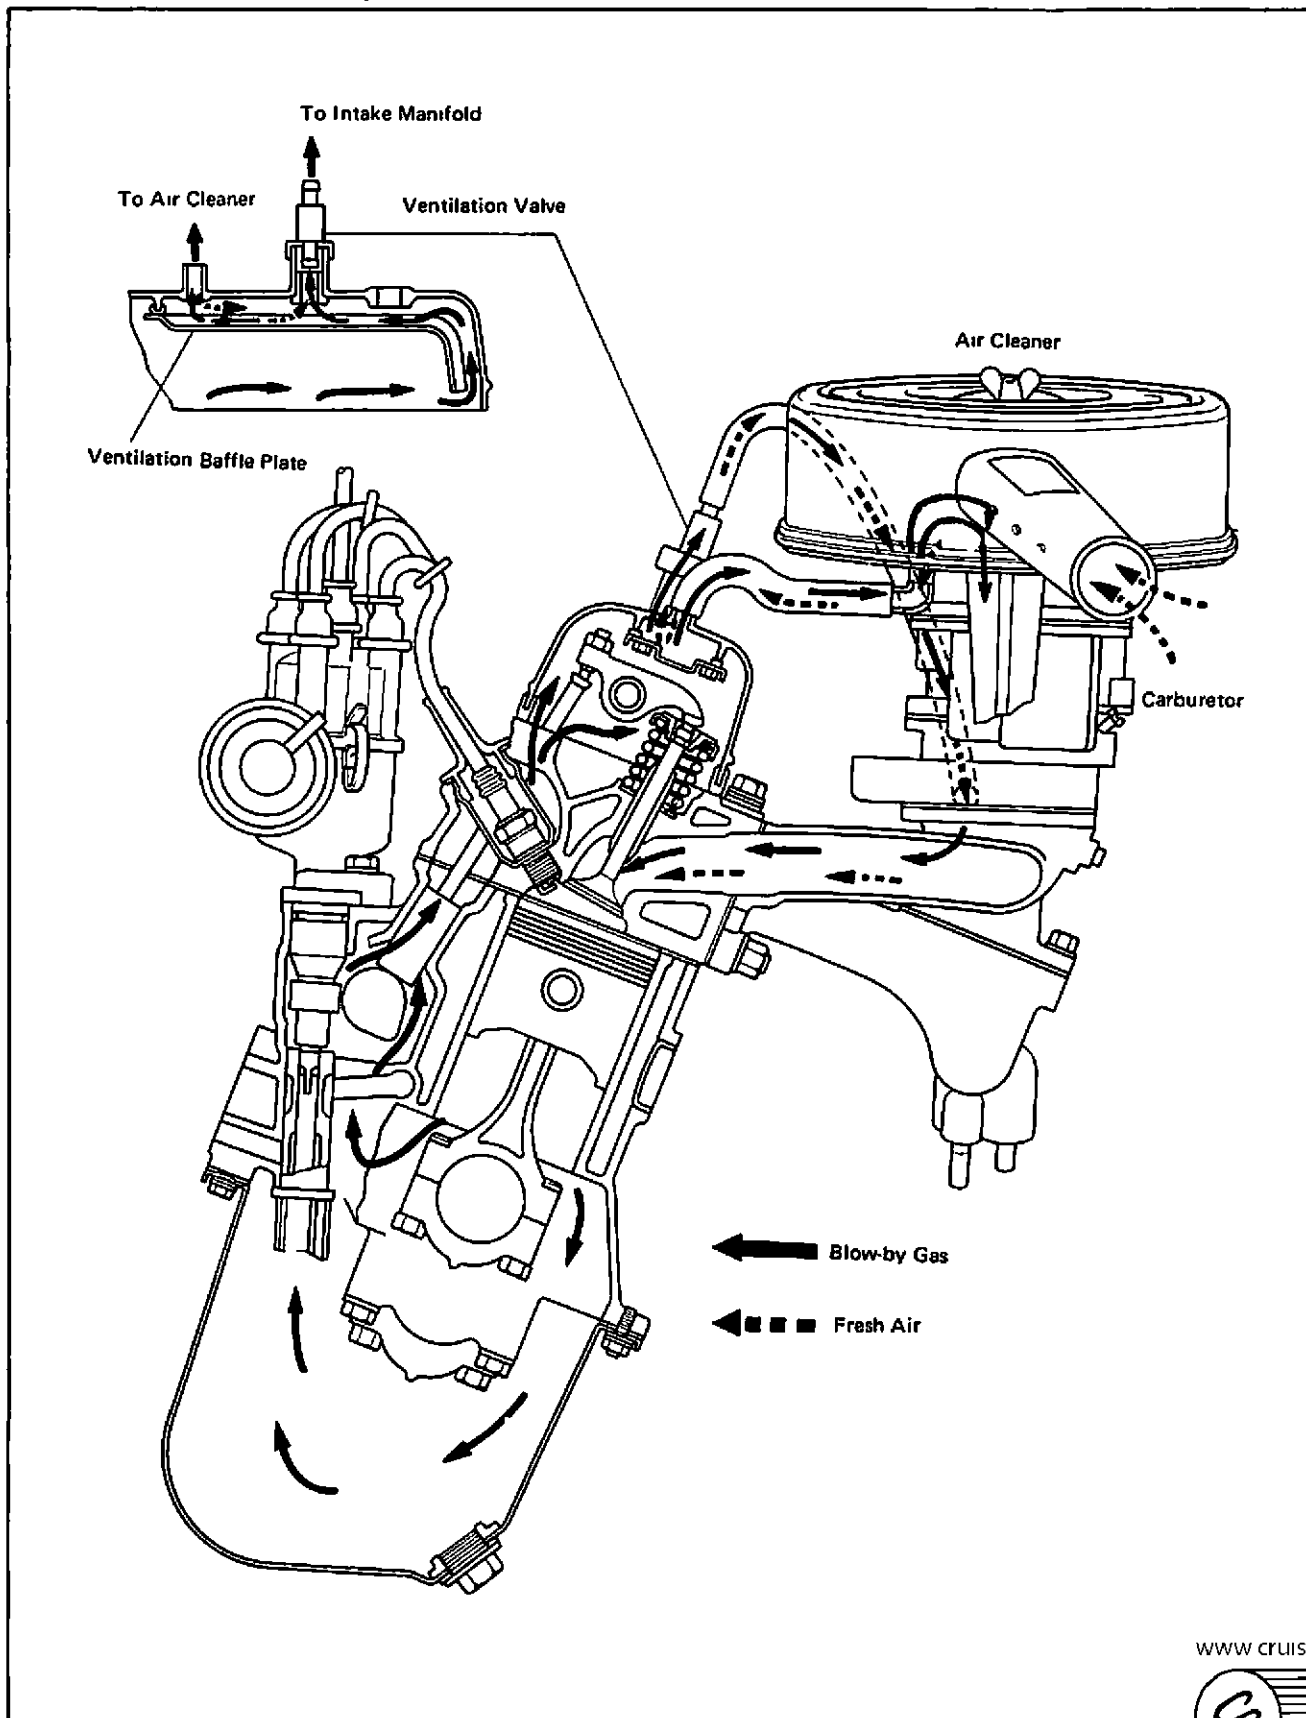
3K-C Engine Positive Crankcase Ventilation System
